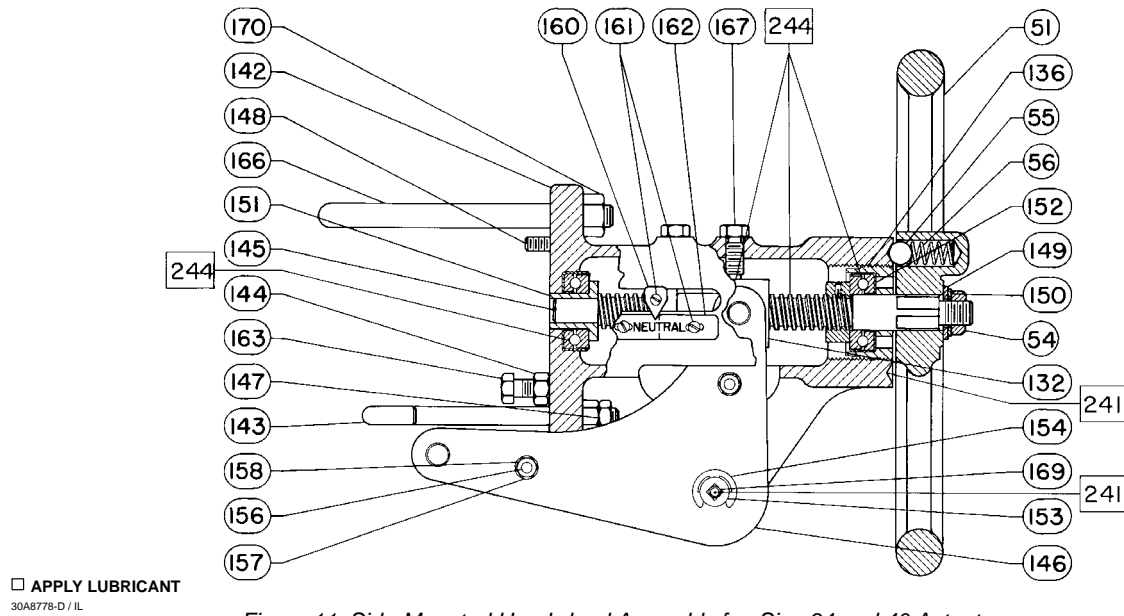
Side-Mounted Handwheel Assembly for Size 34 and 40 Actuators
